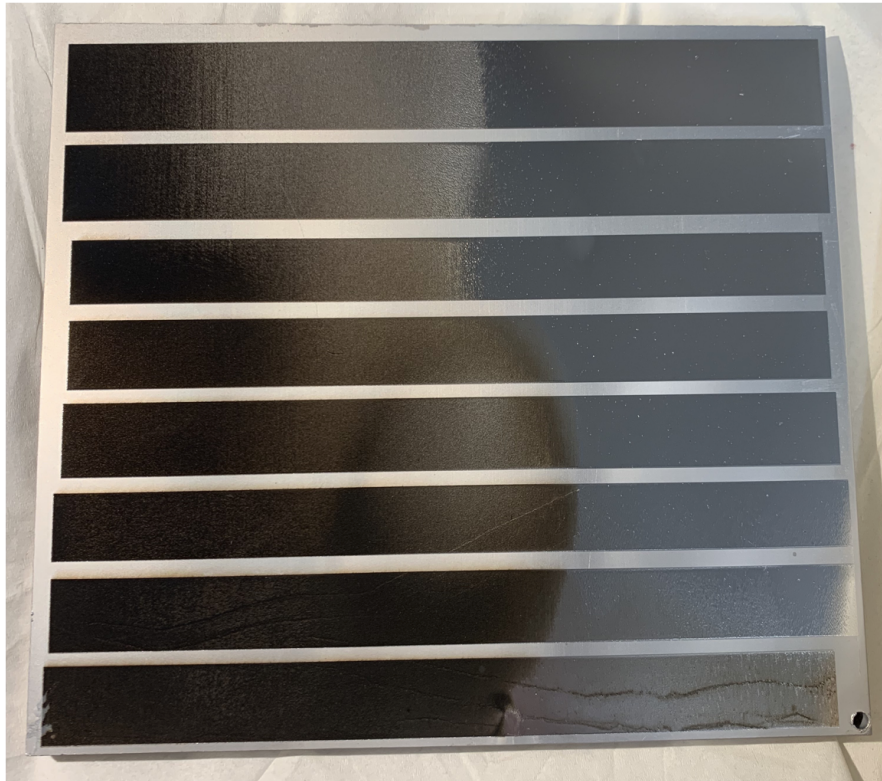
The bottom part of the AlSiCr plate after laser surface remelting
